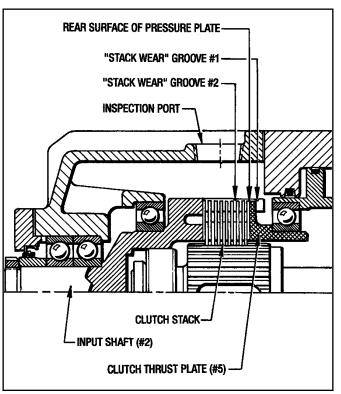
Checking Clutch and Brake Stacks for Wear
